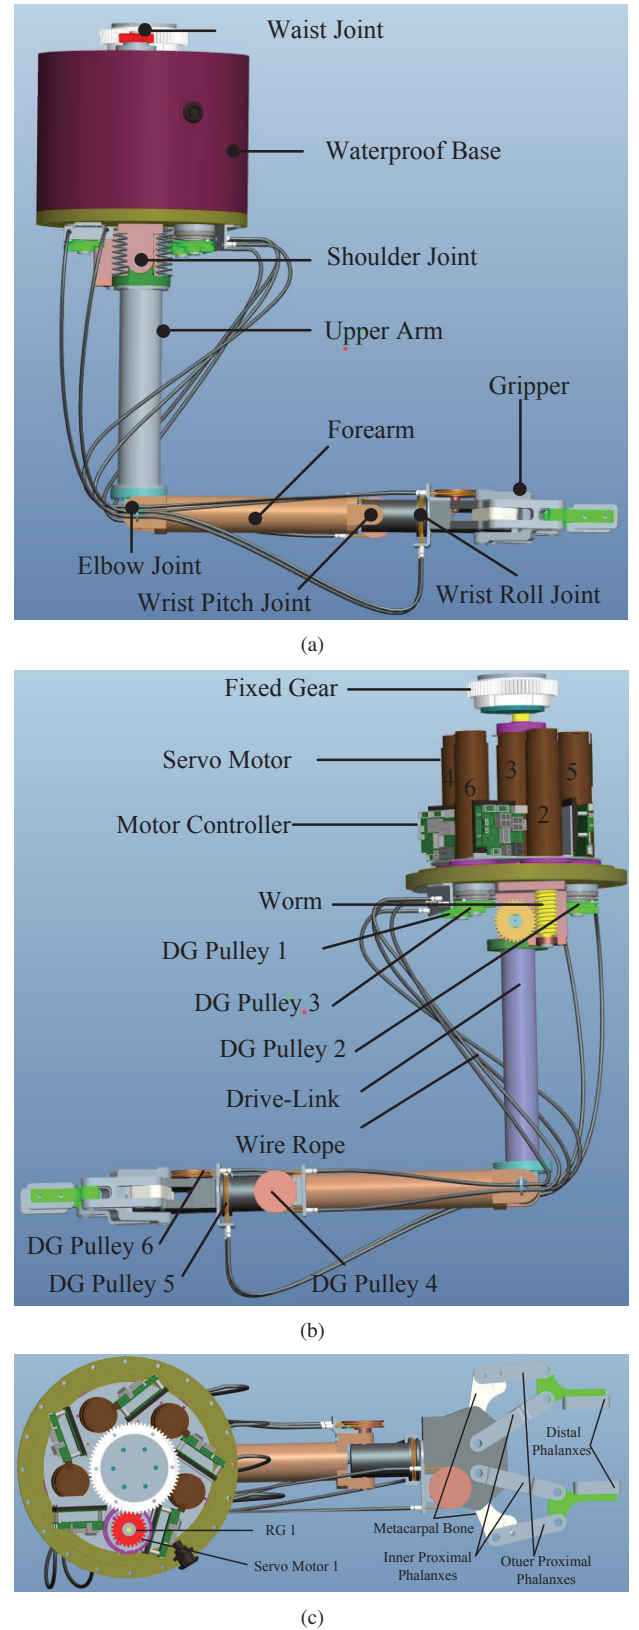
Mechanism design of the manipulator. (a) Right view. (b) Left view. (c) Top view. RG and DG are the abbreviations of Reduction Gear and Double-Grooved respectively.
